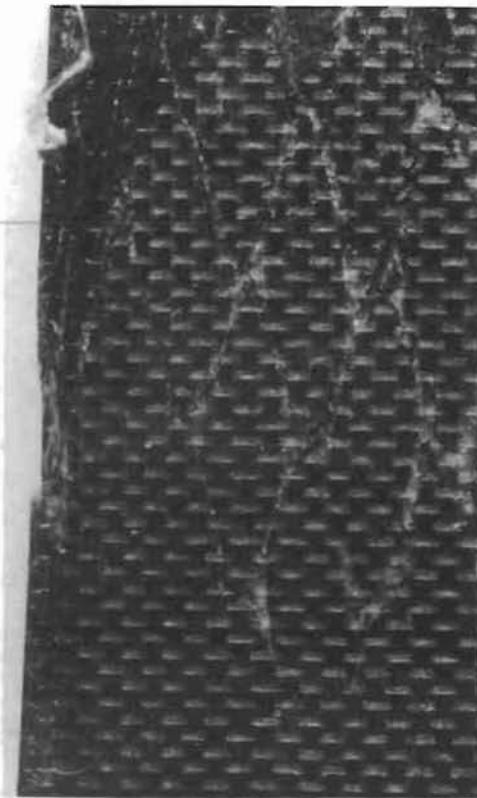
Fractured Flexural Specimen, T-300/5208, 30K Tow (Surface View Showing Tow Debonds)
